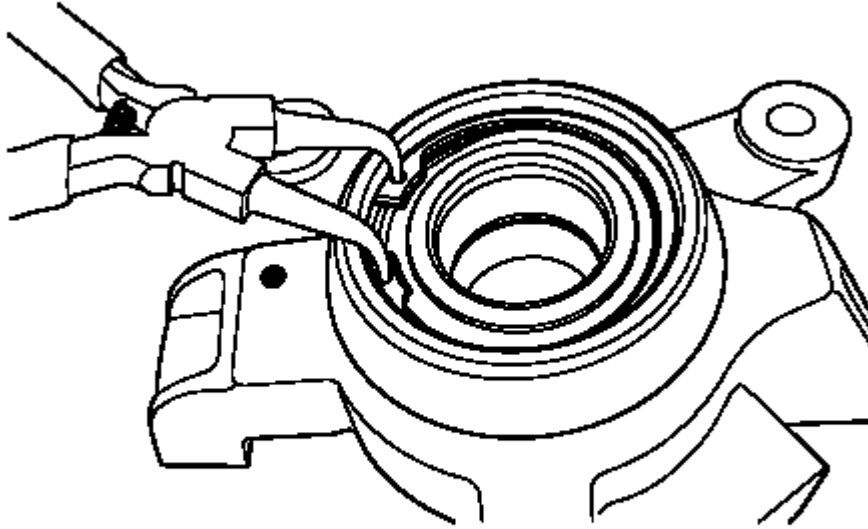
Wheel Bearing Retaining Ring And Steering Knuckle
